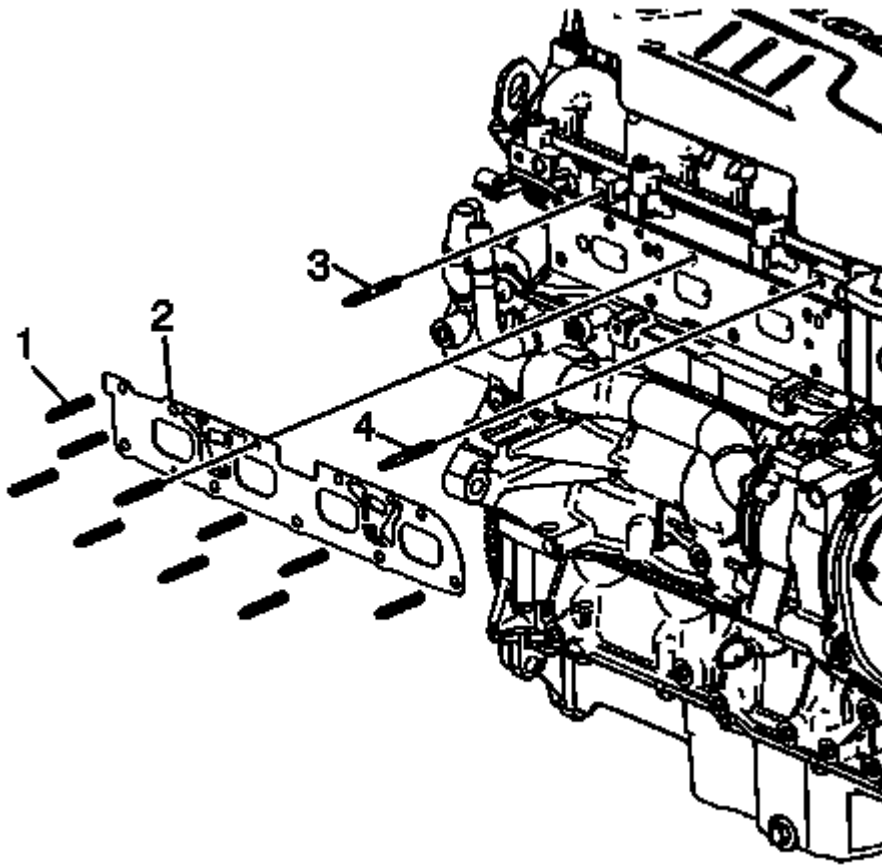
Upper Secondary Air Injection Assembly Studs, Exhaust Manifold Gasket & Studs
